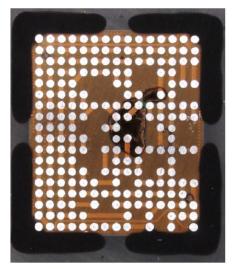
Bottom side flat section view showing edgebond contacting the BGA.
